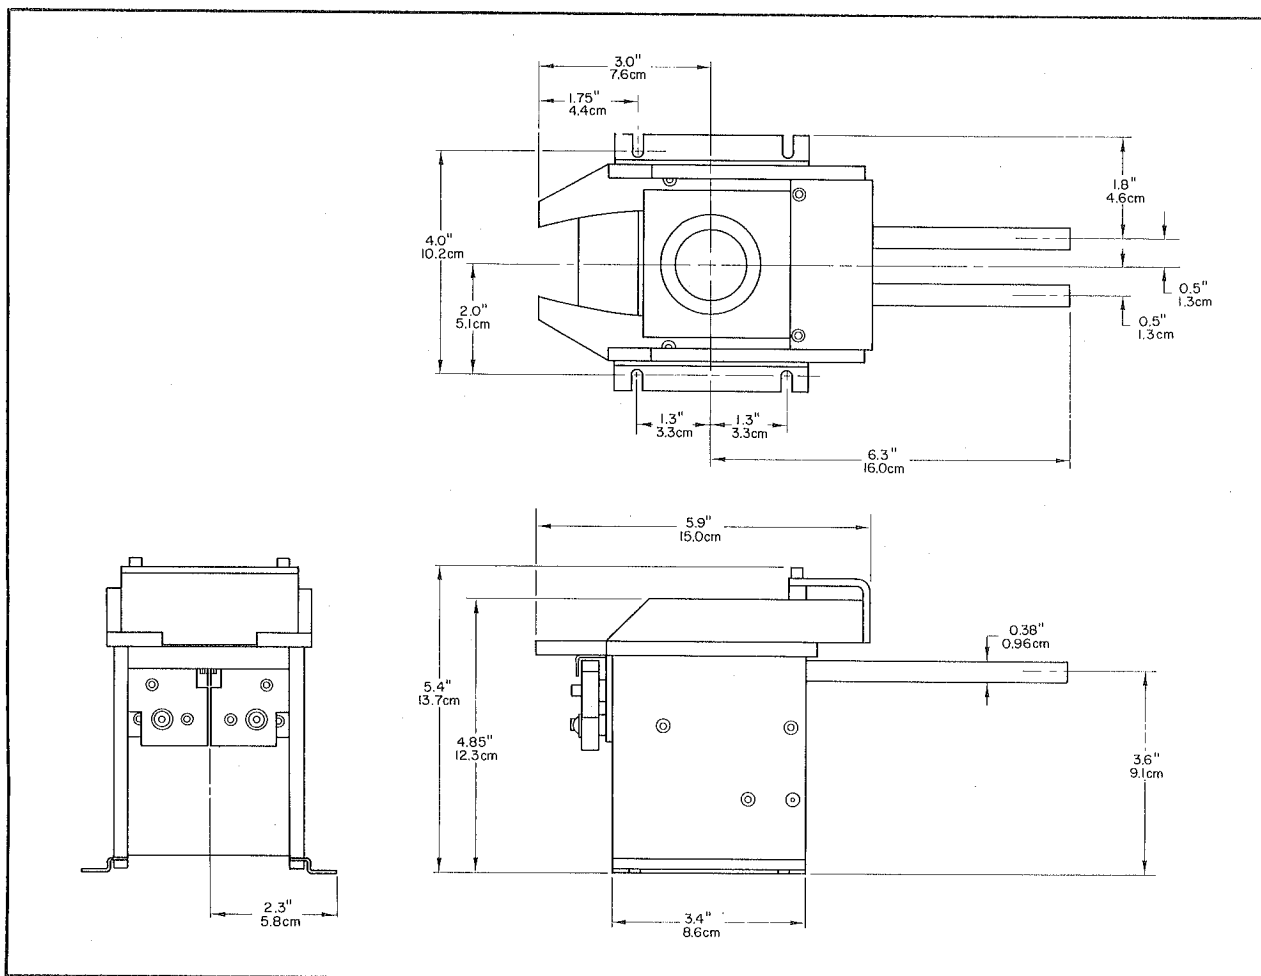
Dimensional Drawing of Single Hearth Electron Beam Gun, 270° Bent Beam.
